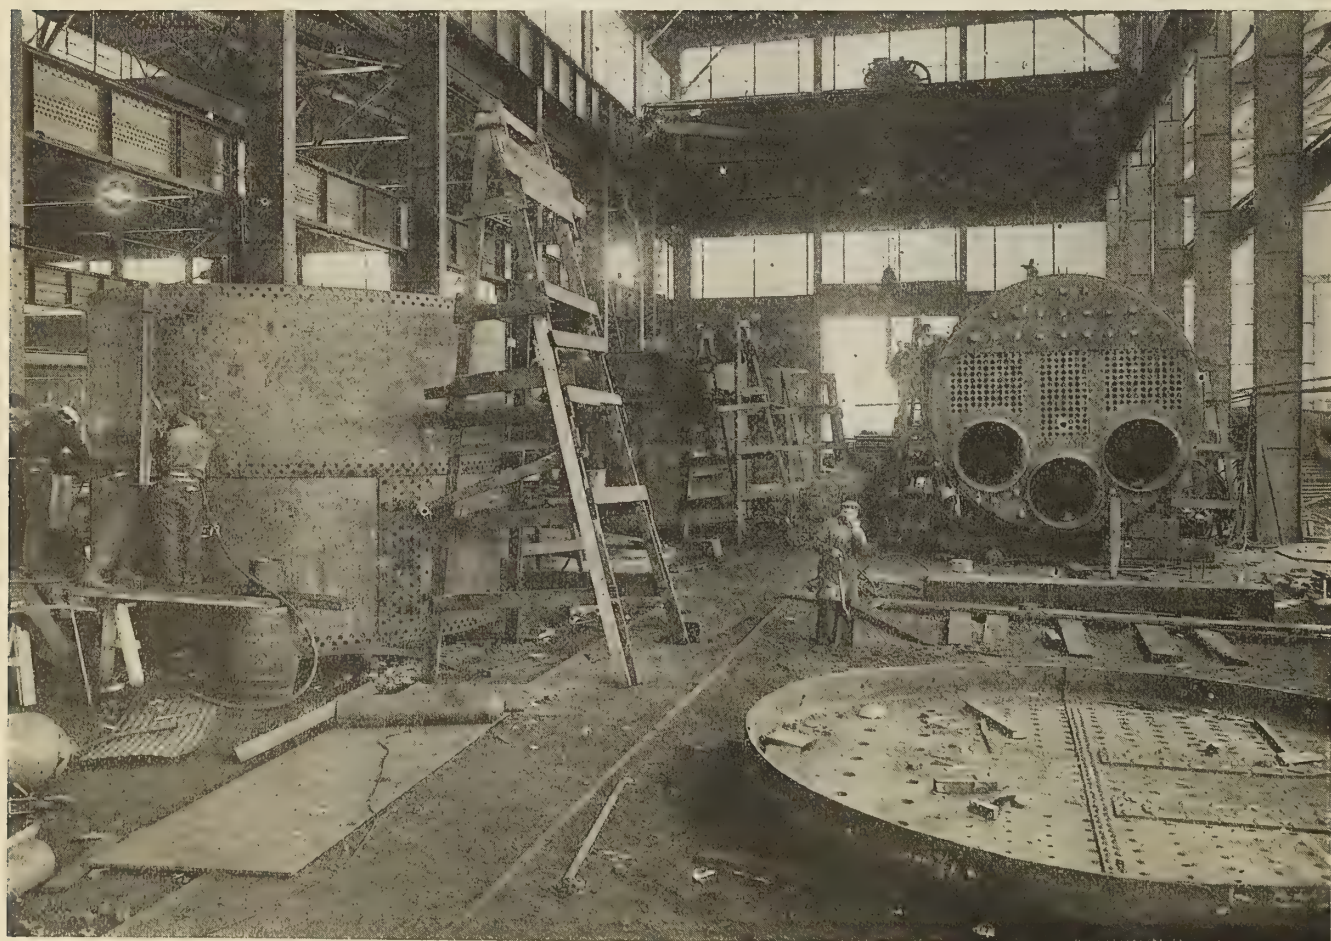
Another View of the Boiler Shop Showing Boiler in Course of Assembling
